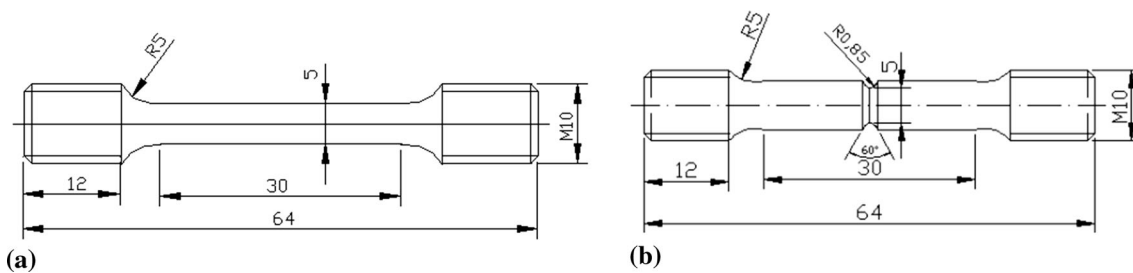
Dimensions of the standard tensile and notch tensile specimens. (a) smooth rod tensile specimens and (b) standard notch tensile specimens
